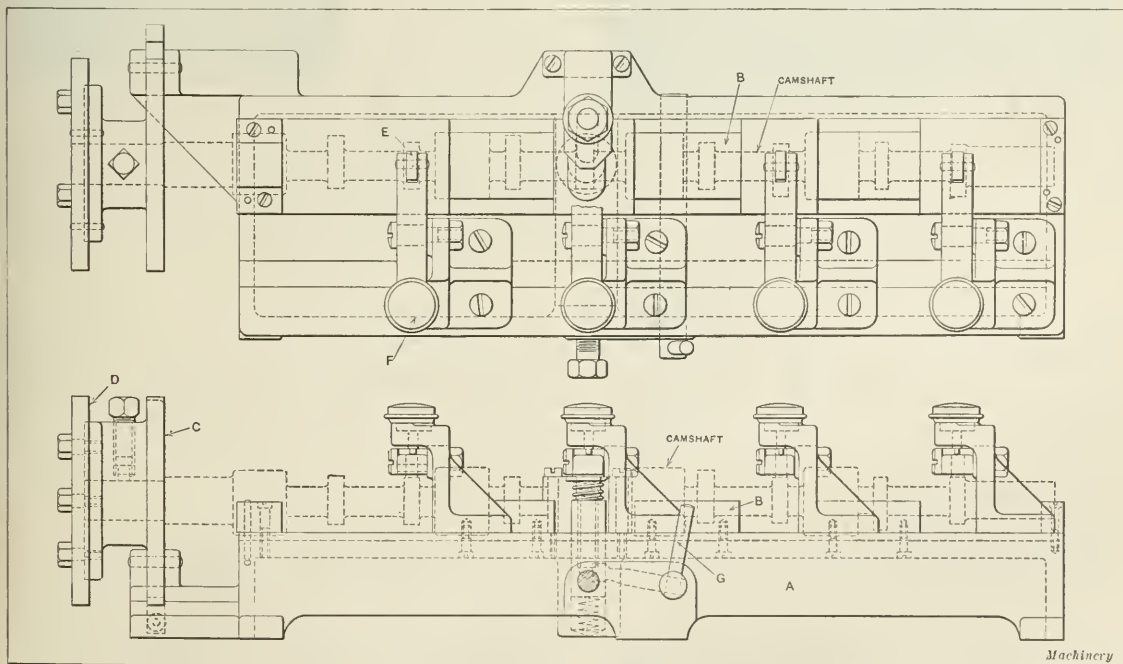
Multiple Type of Cam-shaft Testing Fixture used for inspecting Cam-shafts for Twin Four-cylinder Engines
